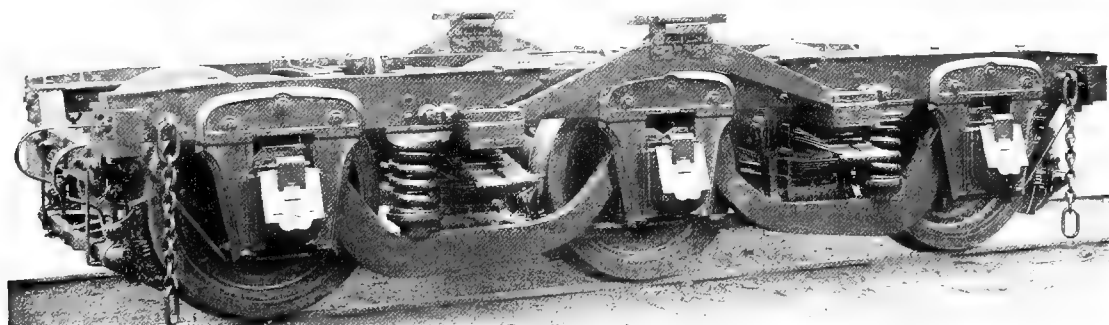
Six-Wheel Steel Truck. The Harlan & Hollingsworth Corporation.
